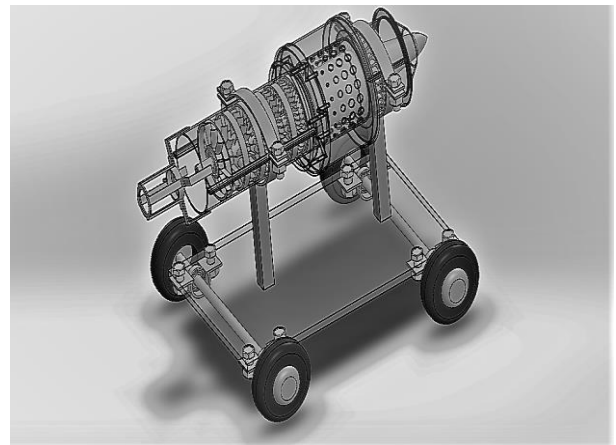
Translucent view of the designed SSTE test rig geometry
